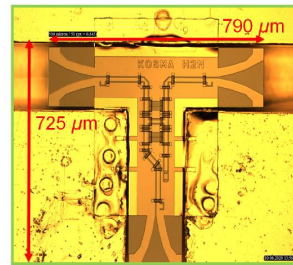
Fabricated and assembled power divider in the 2-pixel block.
